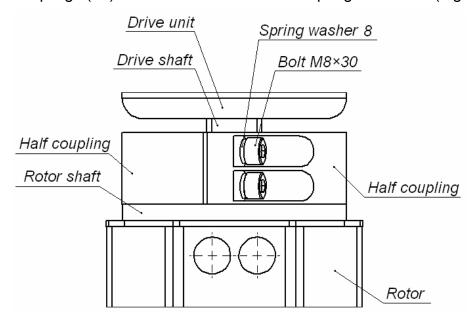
Juncture of the operating mechanism shaft with the rotor (1) shaft by the union joint (16)
